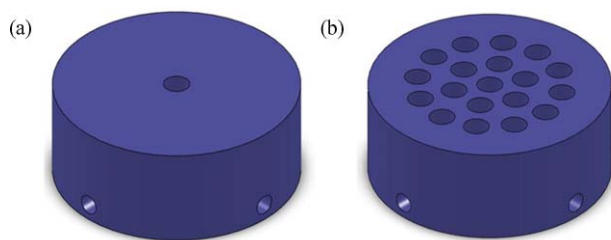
(Color online) Isometric views of Al single powder sample holder (a) and Mo high-throughput sample holder (b).
